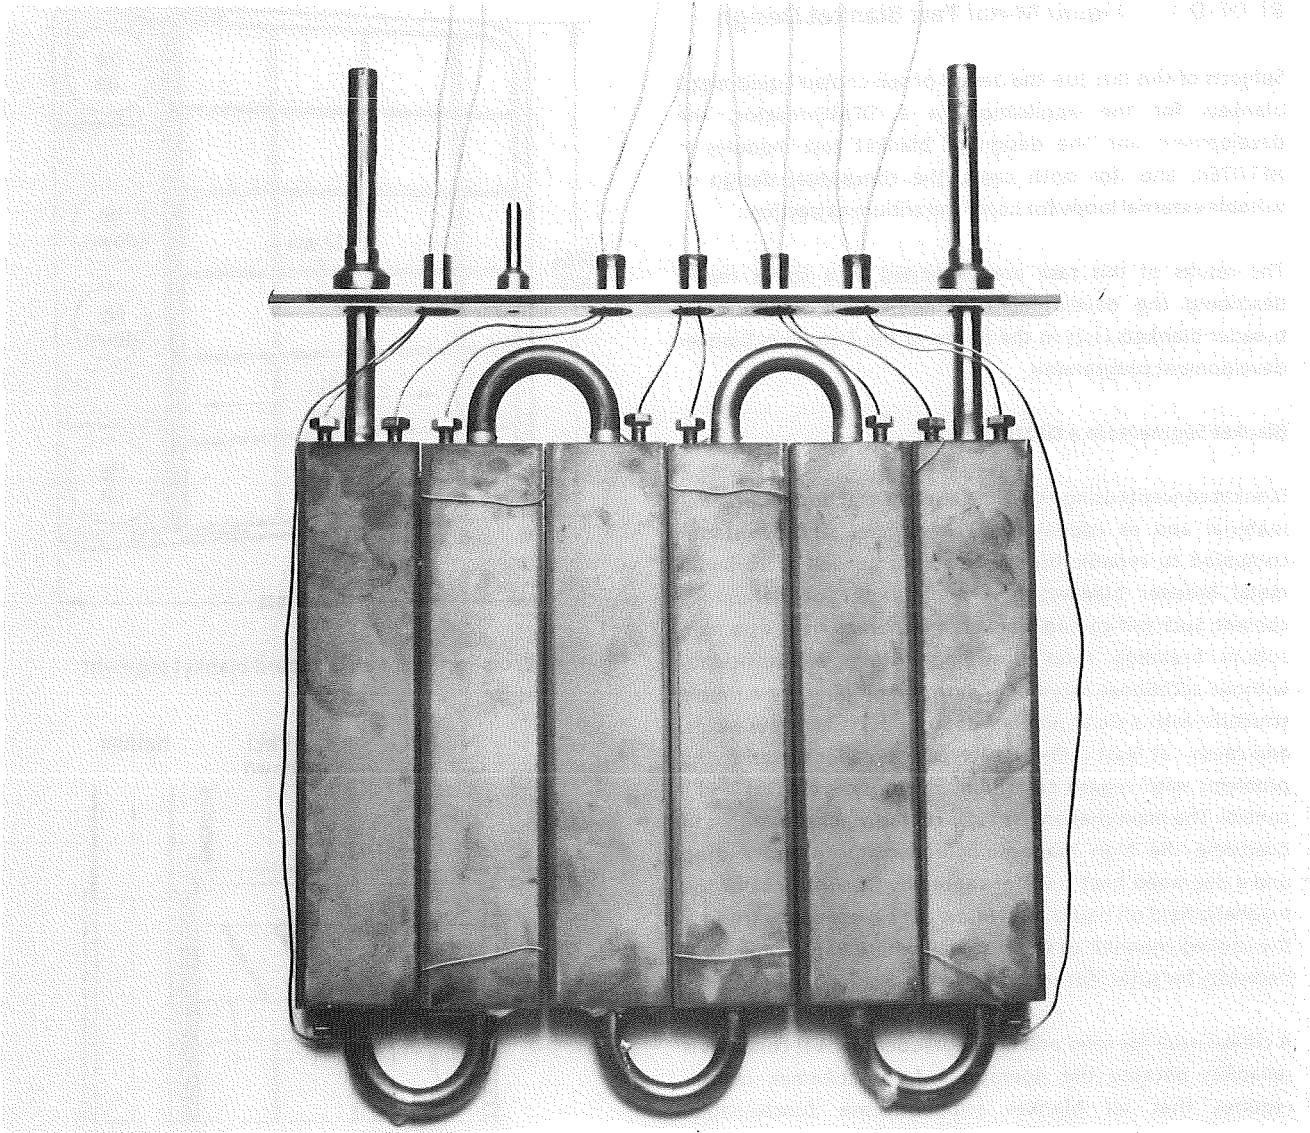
Beryllium parts brazed onto a cooling pipe coil for temperature transient tests
